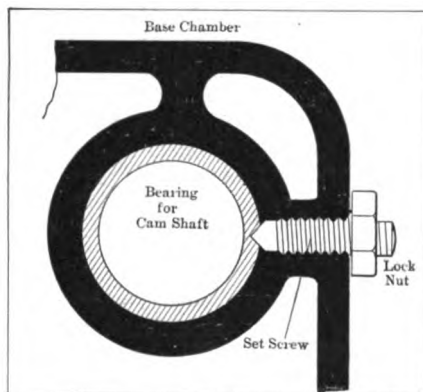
Manner of fitting set screw to hold camshaft bushing in place
